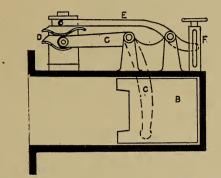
Sectional Plan of Feeding Arrangement; Bennis' Sprinkling Stoker.
